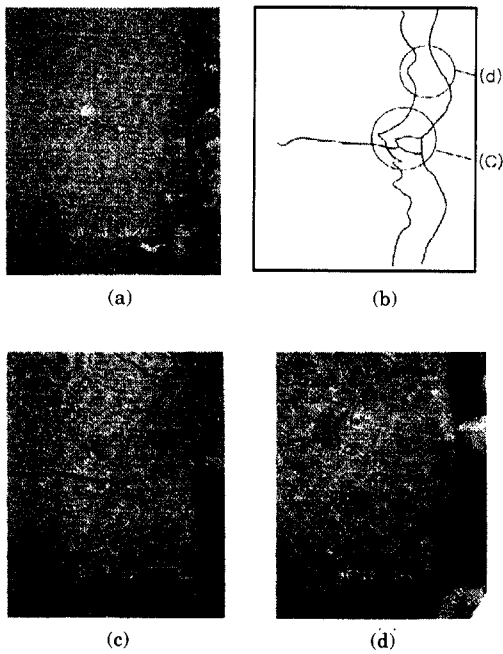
A cross section of carburized gear after loading (Loading was stopped just after the breakage of detective gage)
